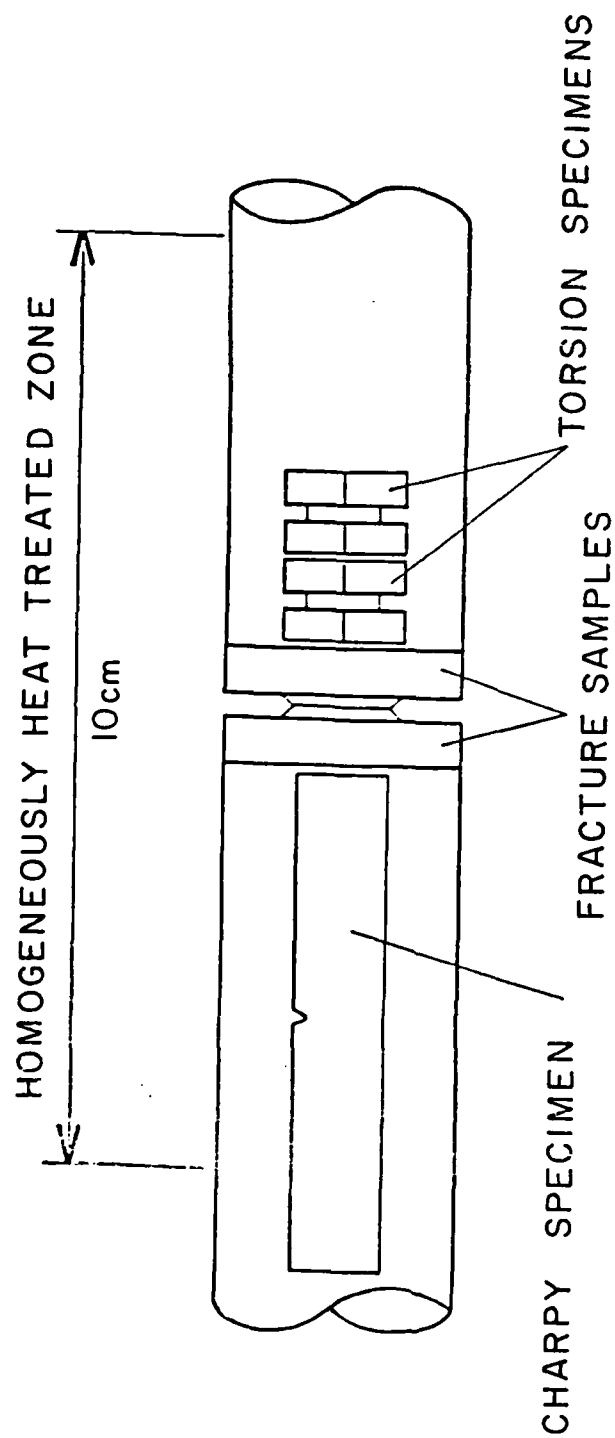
Location of the torsion and Charpy specimens in the homogeneously heat-treated zone of the fracture specimen.
